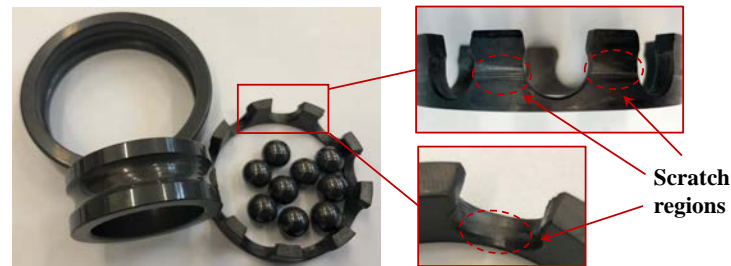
Removed silicon nitride full ceramic ball bearing and its components.
